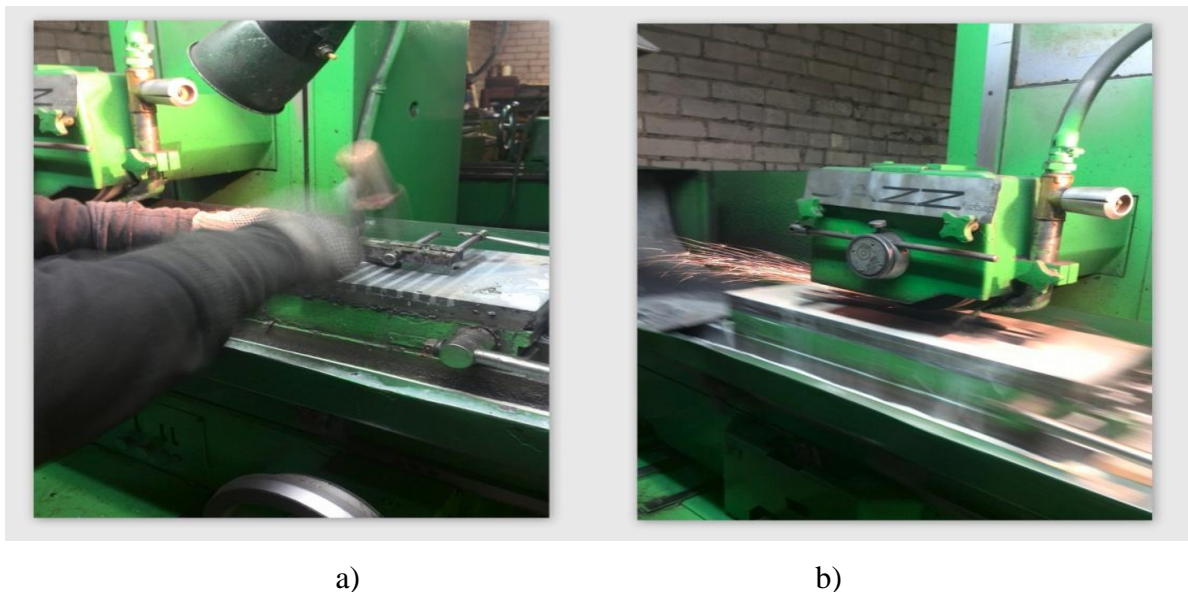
Tightening the band saw pieces 1 with a special holder 2
